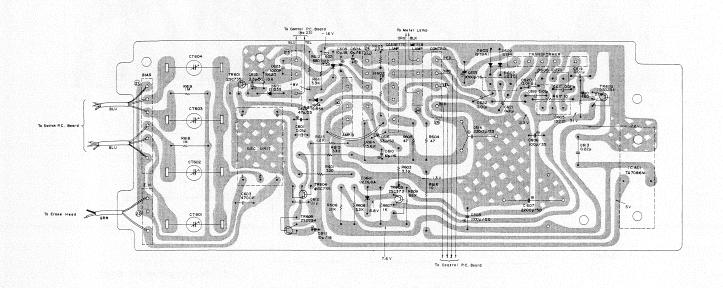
Bottom View of Power Supply P.C. Board, PC-006
